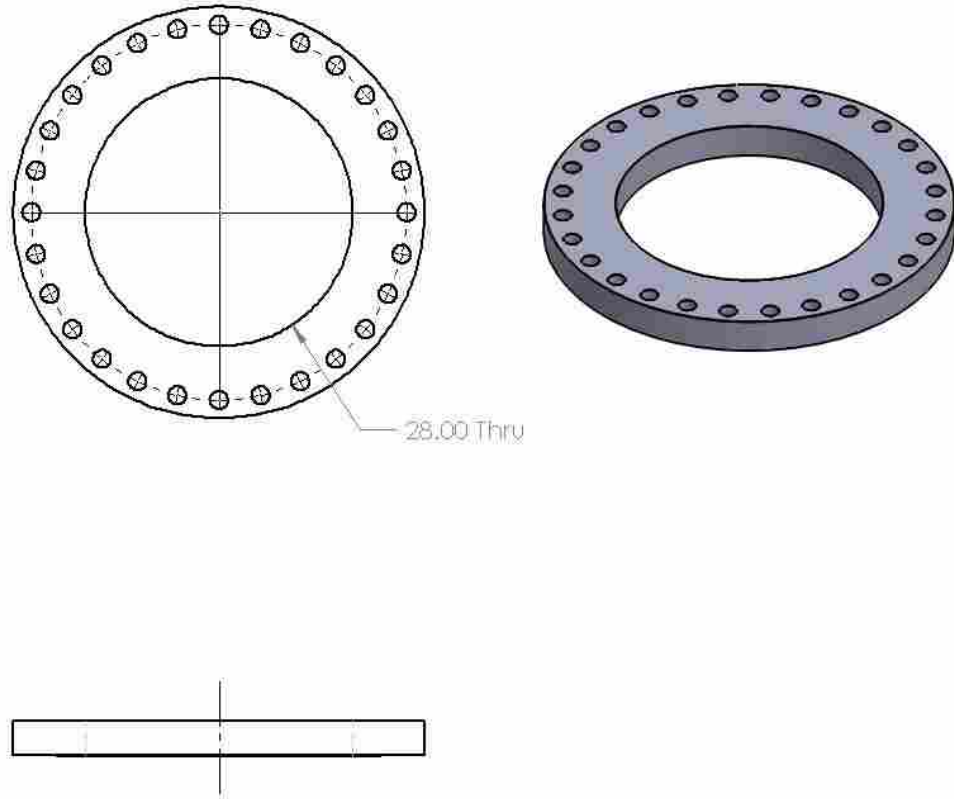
Drawing of 30 Inch X-Heavy Pipe with Hole
